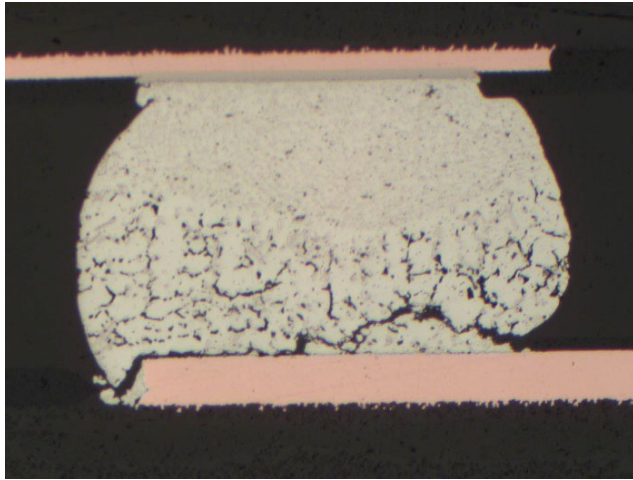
SnPb Solder Alloy BGA (failed at 316 cycles)
